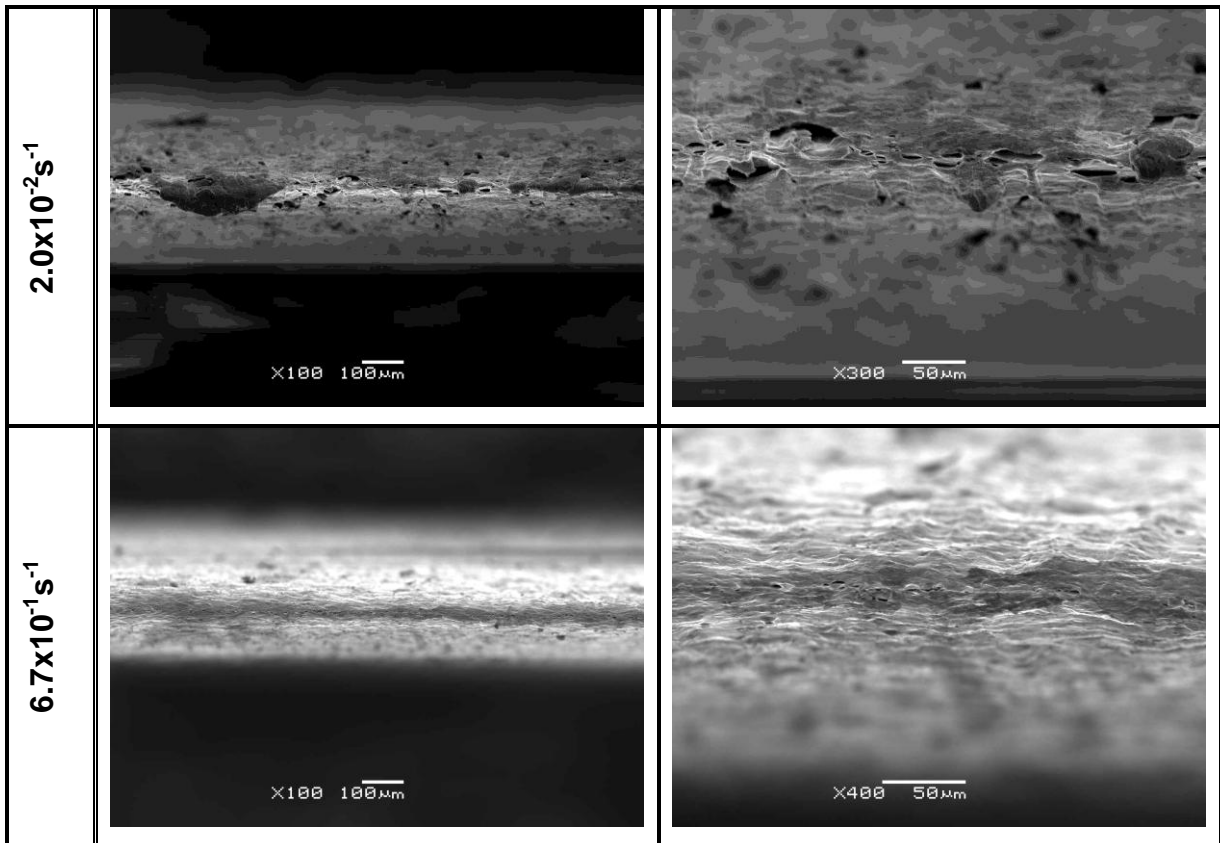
FG sheet tensile tested at 550°C fracture surface images (SE mode).
